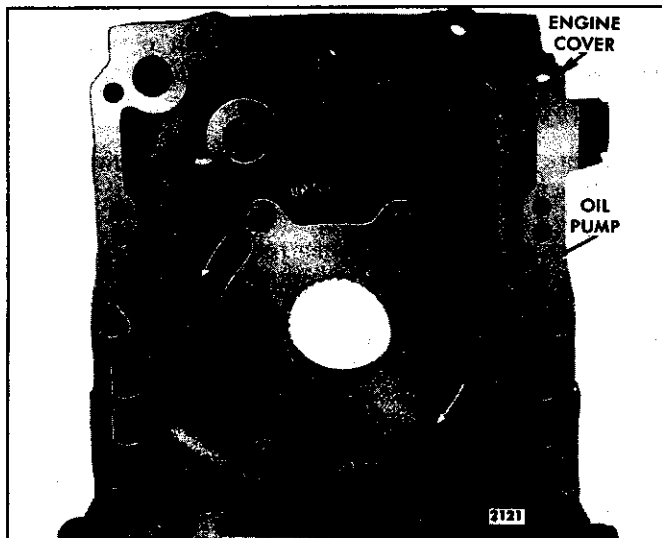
Typical Right-Hand Rotation Oil Pump Mounting
